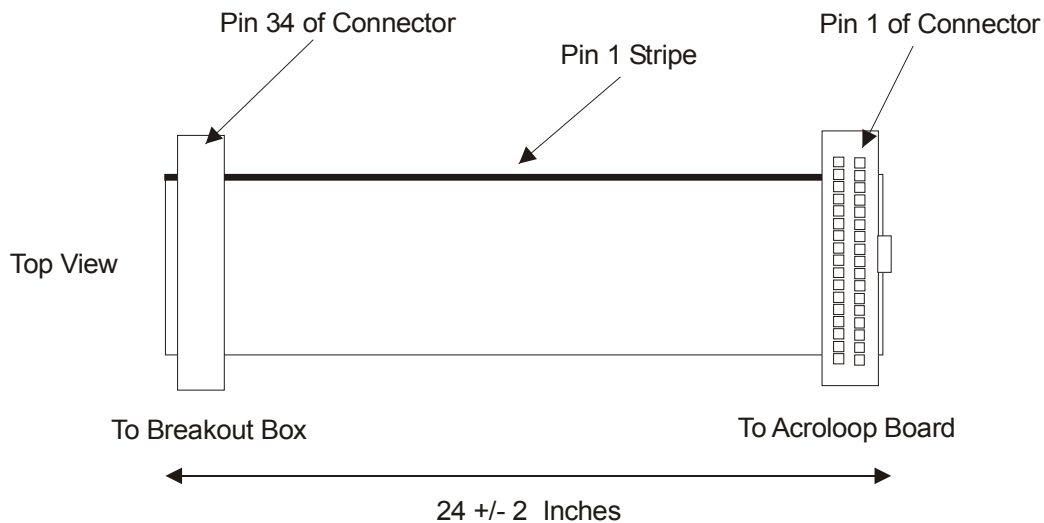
Typical 34-Pin Breakout Box Ribbon Cable
